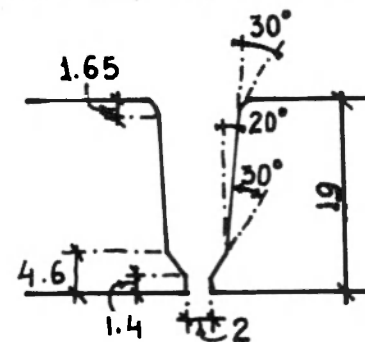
Joint design of H.C. Price for 19mm thickness (Dimensions in millimeters)
